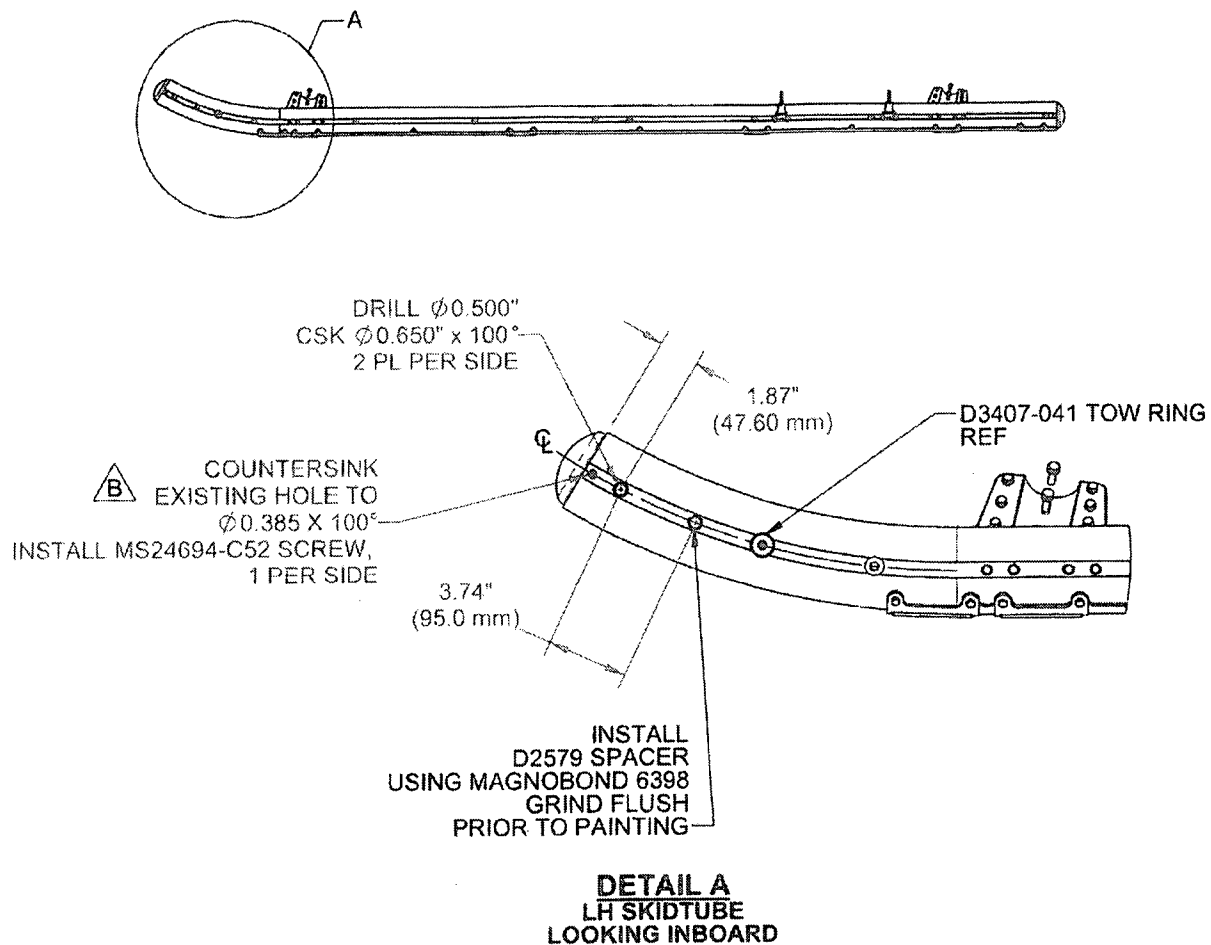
MODIFIED D119-646-XXX SKIDTUBE
